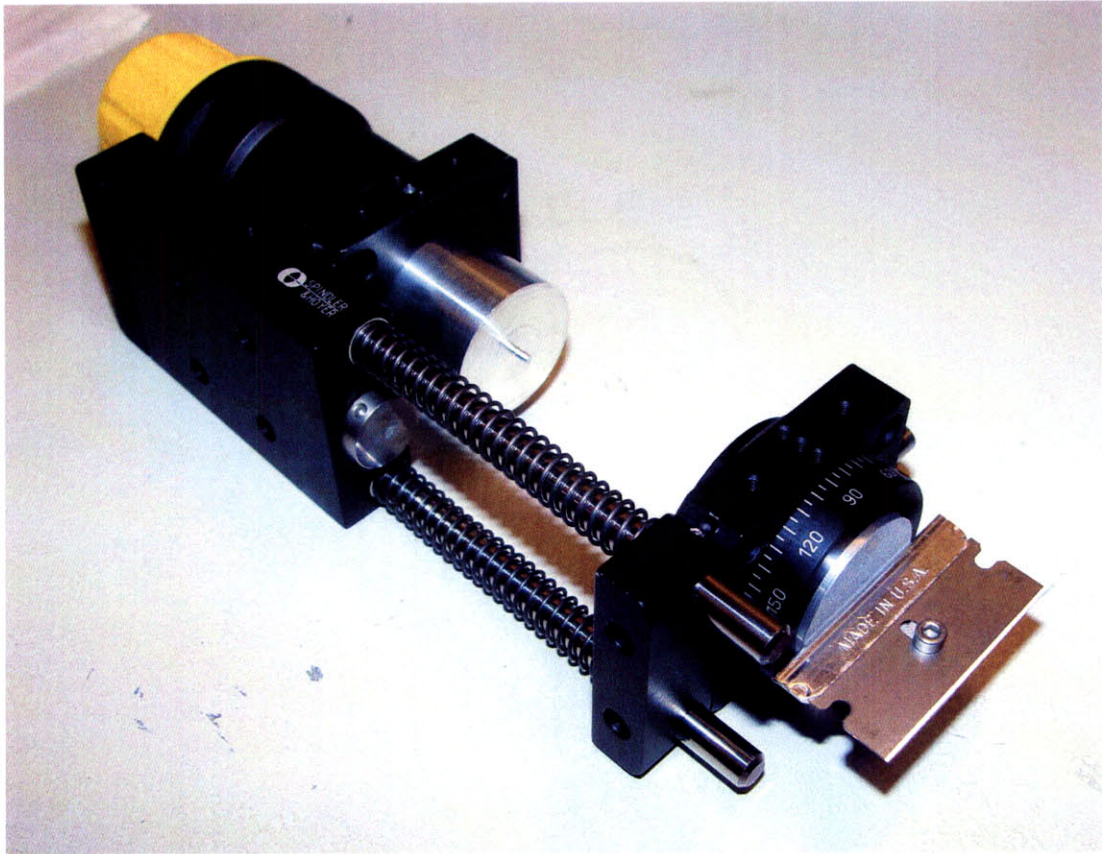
A custom built polymer slicing tool, designed to mount into the Mazak turning center.
